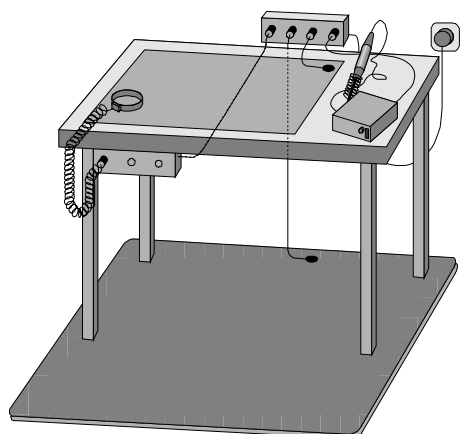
1 Example of a workstation with ESD protection equipment
